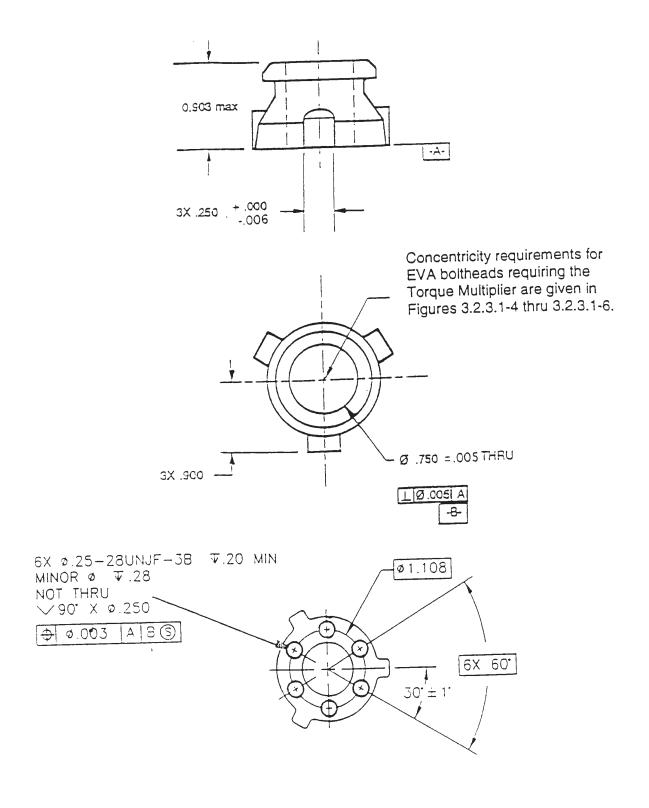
0006055 AND 0006057 MICROCONICAL FITTING BOLTHOLE PATTERN AND FOOTPRINT
